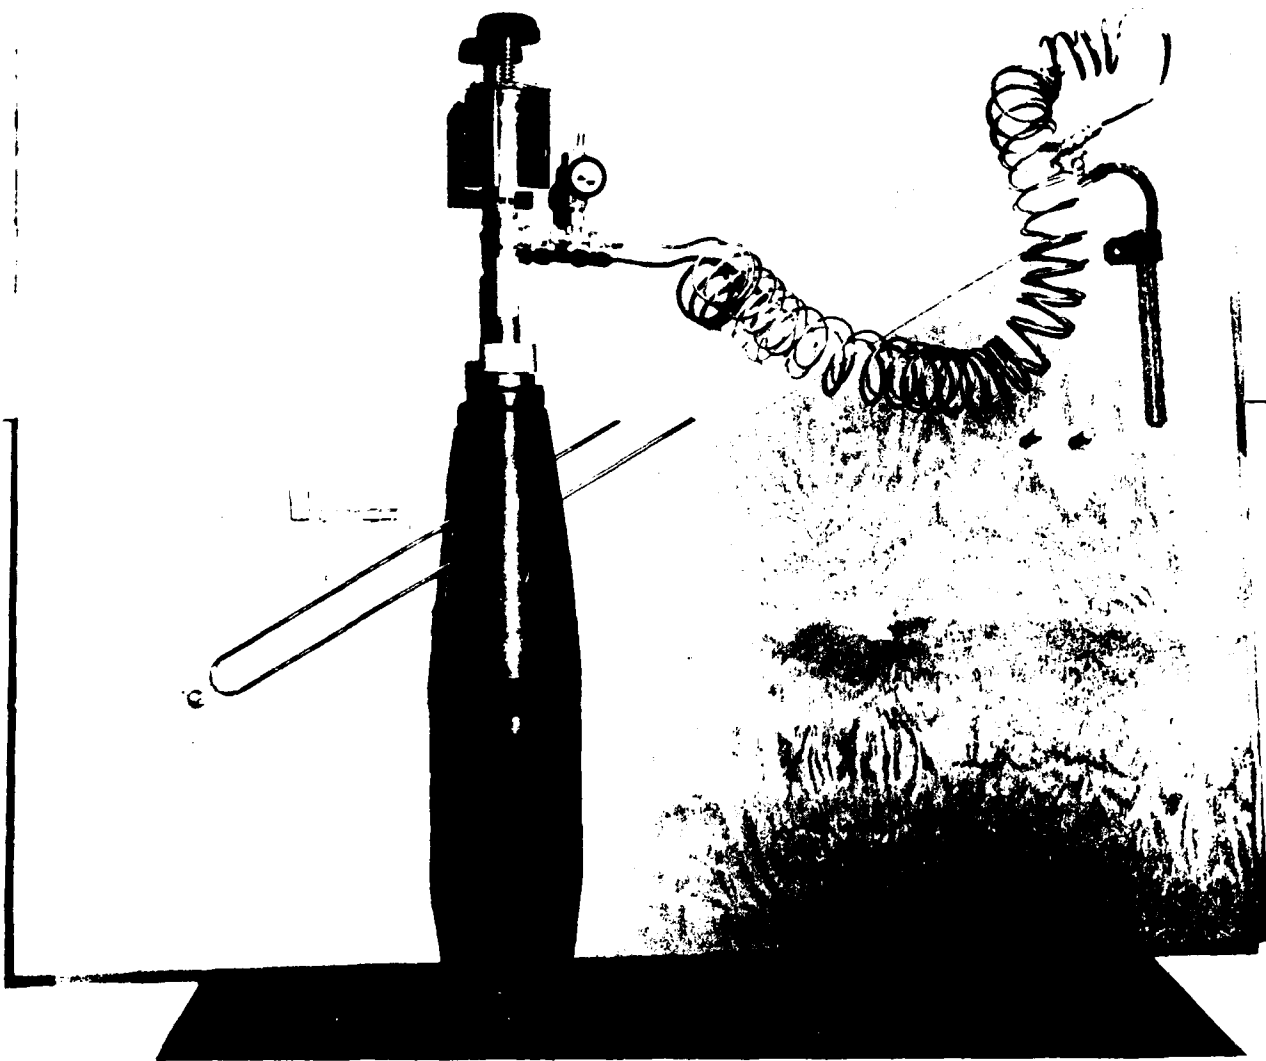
LABORATORY DEMONSTRATION APPARATUS; THE INSPECTION FIXTURE IS INSERTED INTO THE NOSE FUZE OPENING OF AN INERT HIFRAG PROJECTILE.
